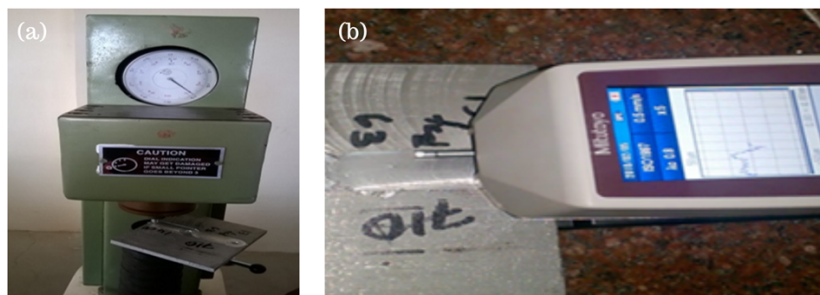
Laboratory equipment used for testing of FSW specimen: (a) Rockwell hardness testing machine; (b) surface profilometer.
